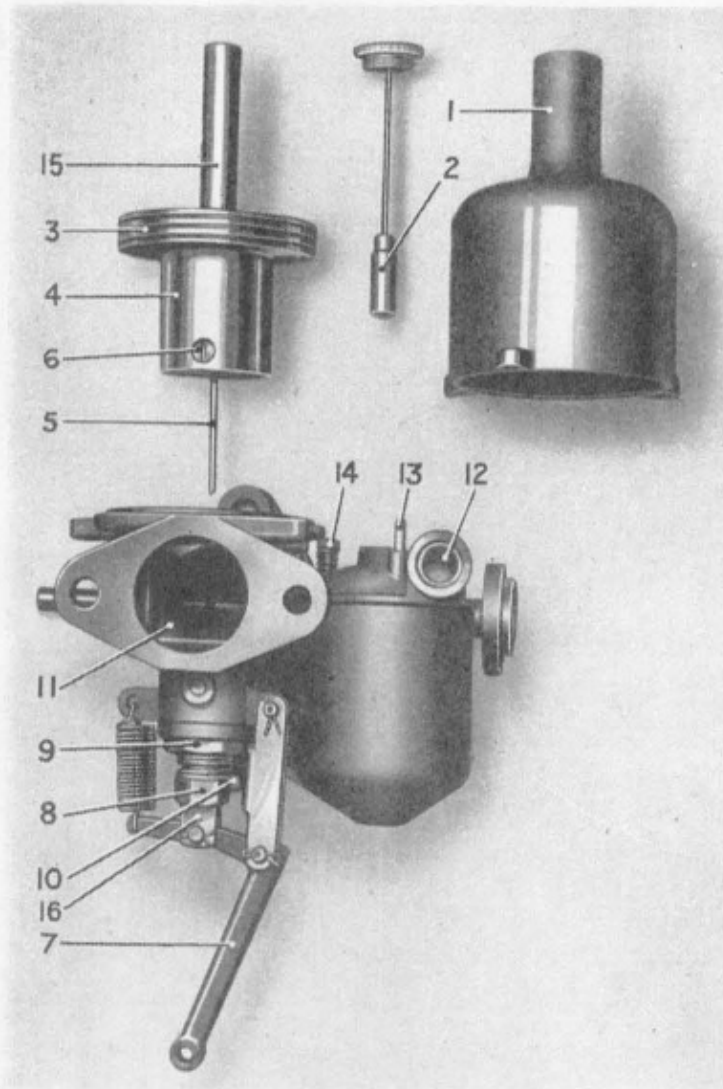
CARBURETTER—EXPLODED VIEW.
